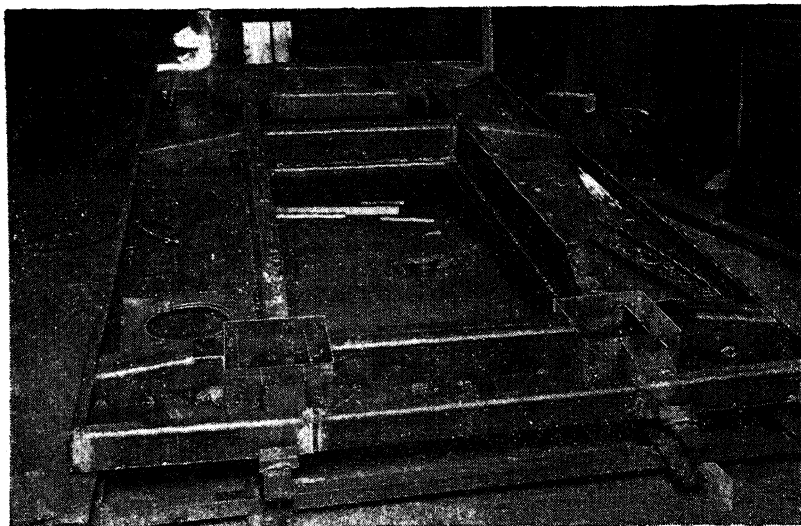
Truck frame, built from high tensile steel by arc welding. Weight savings $33\frac{1}{4}\%$.
